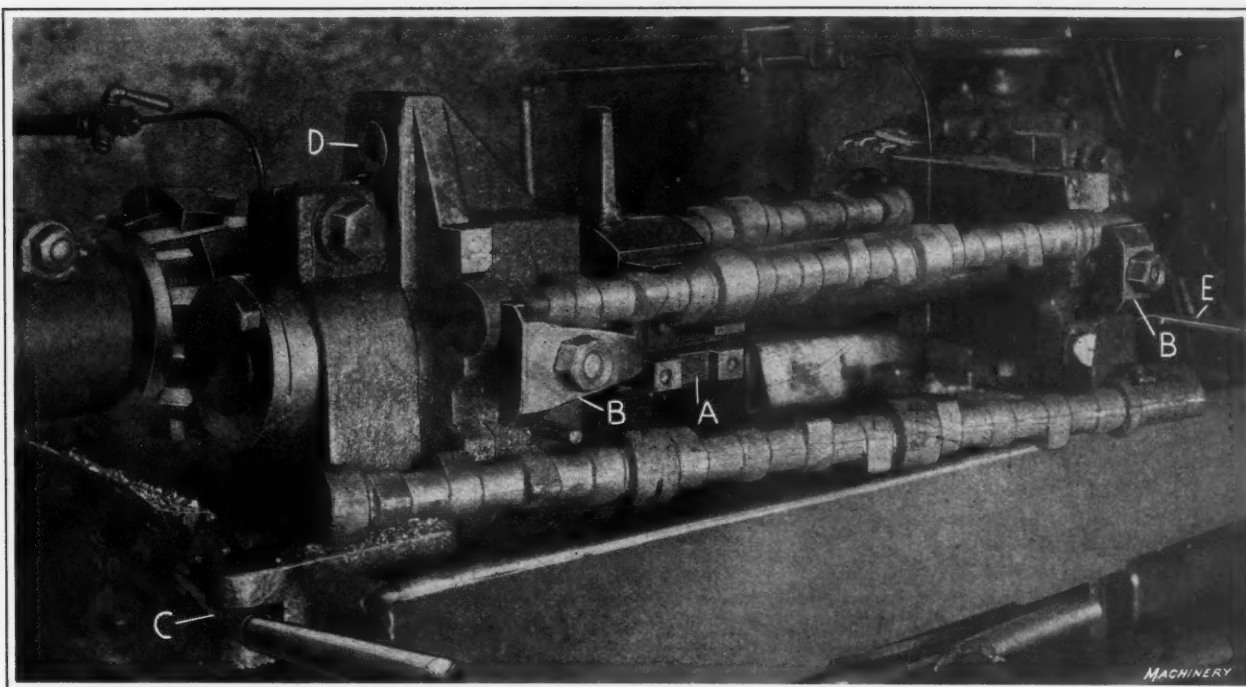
Indexing Work-holding Fixture for straddle-milling Camshafts
